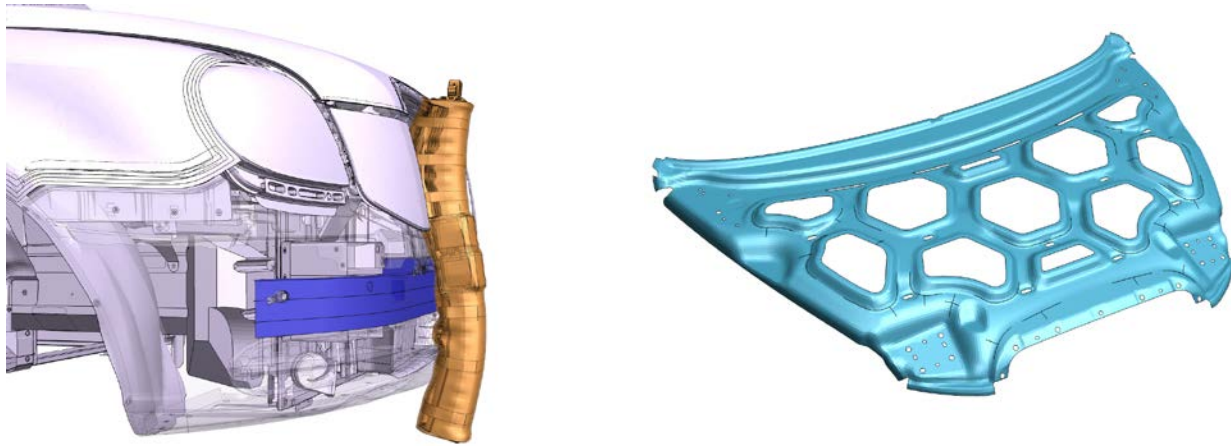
Lower Legform Impact to Bumper using Humanetics Flex PLI Impactor [17], Figure 25 - Bonnet Inner Panel Geometry with Laser Cuts
